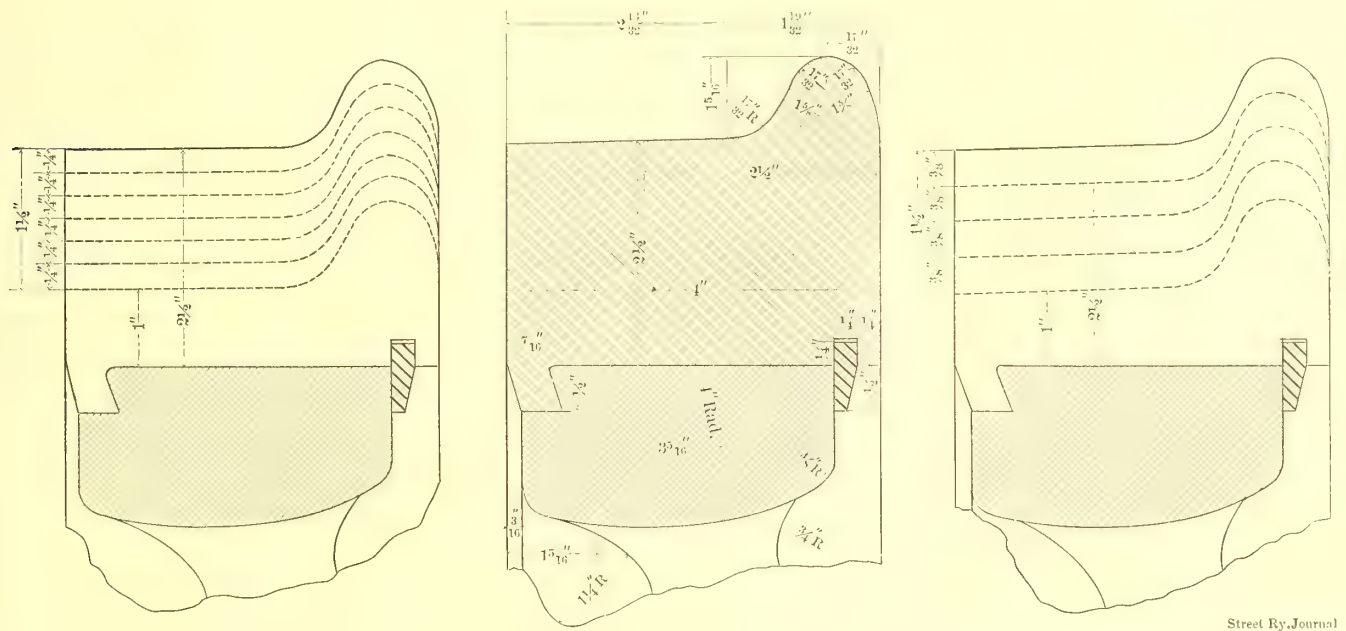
DIAGRAM SHOWING SECTION OF TYPICAL NEW TIRE AND SECTIONS AFTER TURNING DOWN
